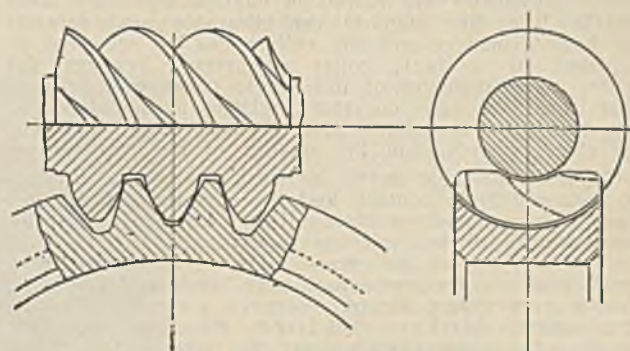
Contact of D.B.S. Patent Worm Gear.
